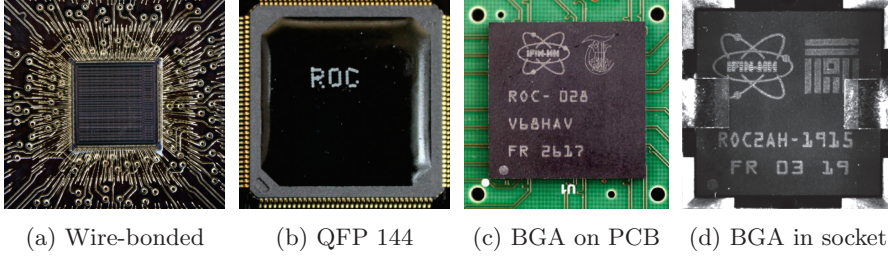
A ROC die wire bonded on a prototype testing PCB (a), the intermediate QFP 144 package (b) and the final  $16 \times 16$  BGA package on a testing PCB (c) and in an open-top socket (d).
